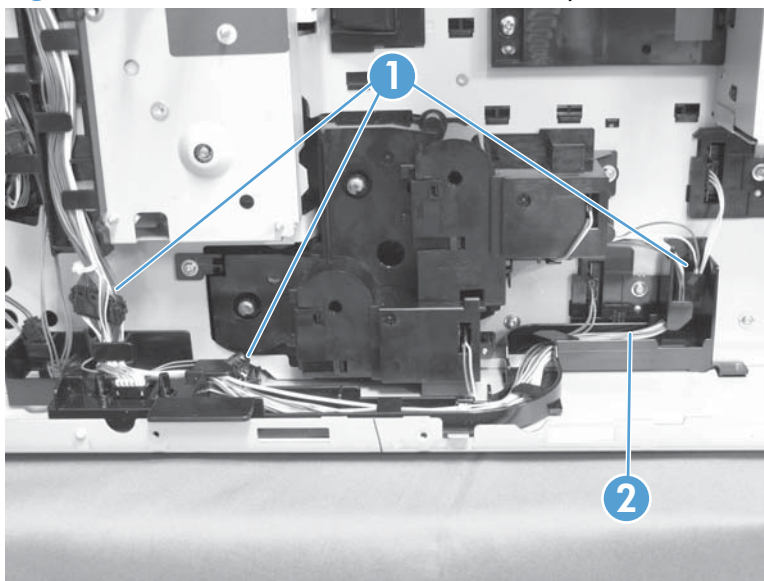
Remove the lower cassette pickup assembly (3 of 3)
